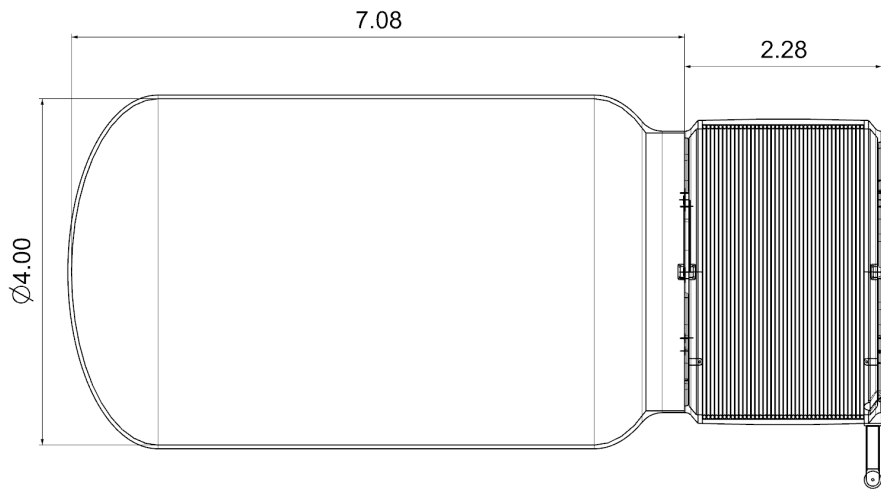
Surface 40 m^3 Dimensioned External Drawing, units in meters
